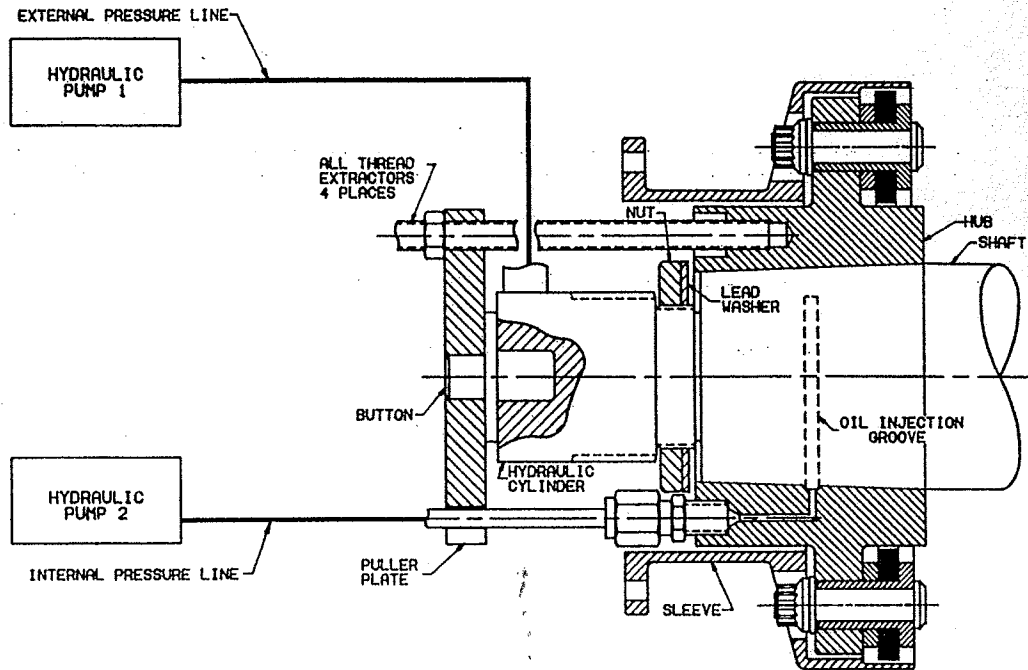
Hydraulic Removal of Keyed Taper Bored Hubs
